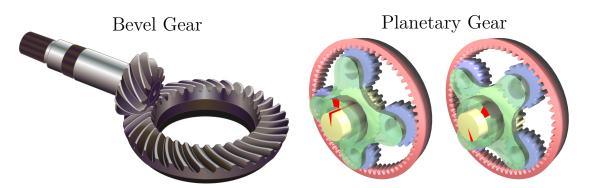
Transmission Components. Illustrations of a bevel- and planetary- gear, which are commonly used transmission elements in BEV- and non-BEV- AWD-systems. Pictures retrieved from Wikipedia [53],[54].
